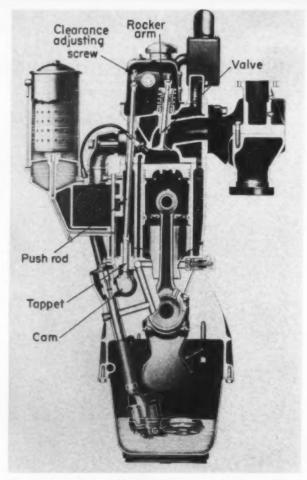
Above—Valve-in-head system requires push rod, rocker arm and rocker arm shaft in addition to parts in L-head system
